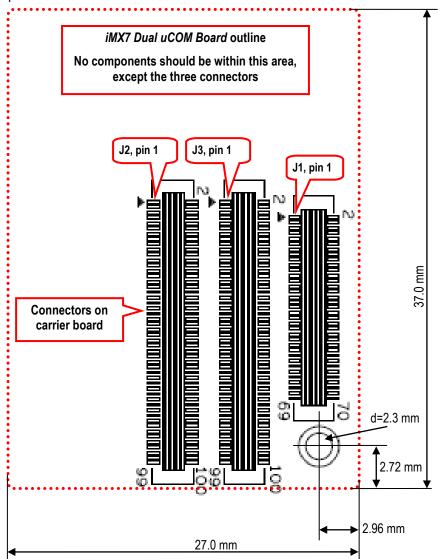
iMX7 Dual uCOM Board Expansion Connectors on Carrier Board, Seen From Top Side
